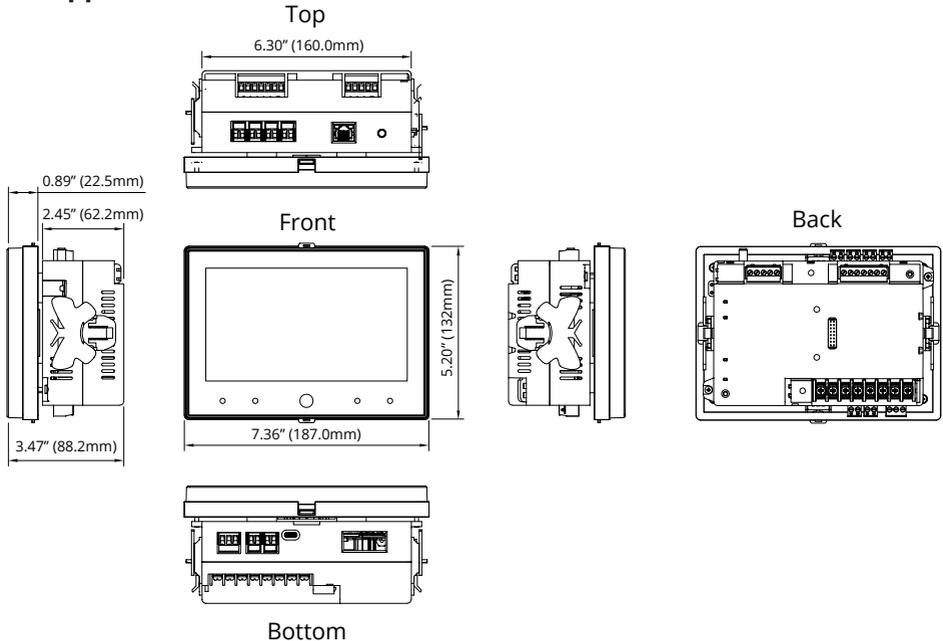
Acuvim 3 Panel Mount Appearance and Dimensions
